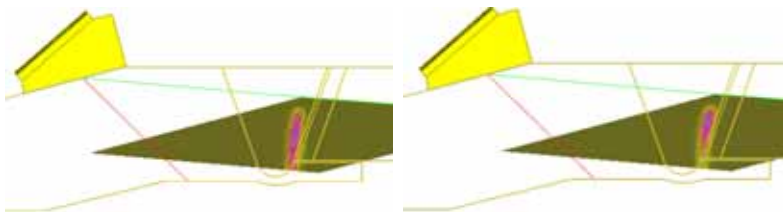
Flaw indication in the component geometry with different material layers. Vertical flaw (left), flaw tilted along the weld groove (right).
